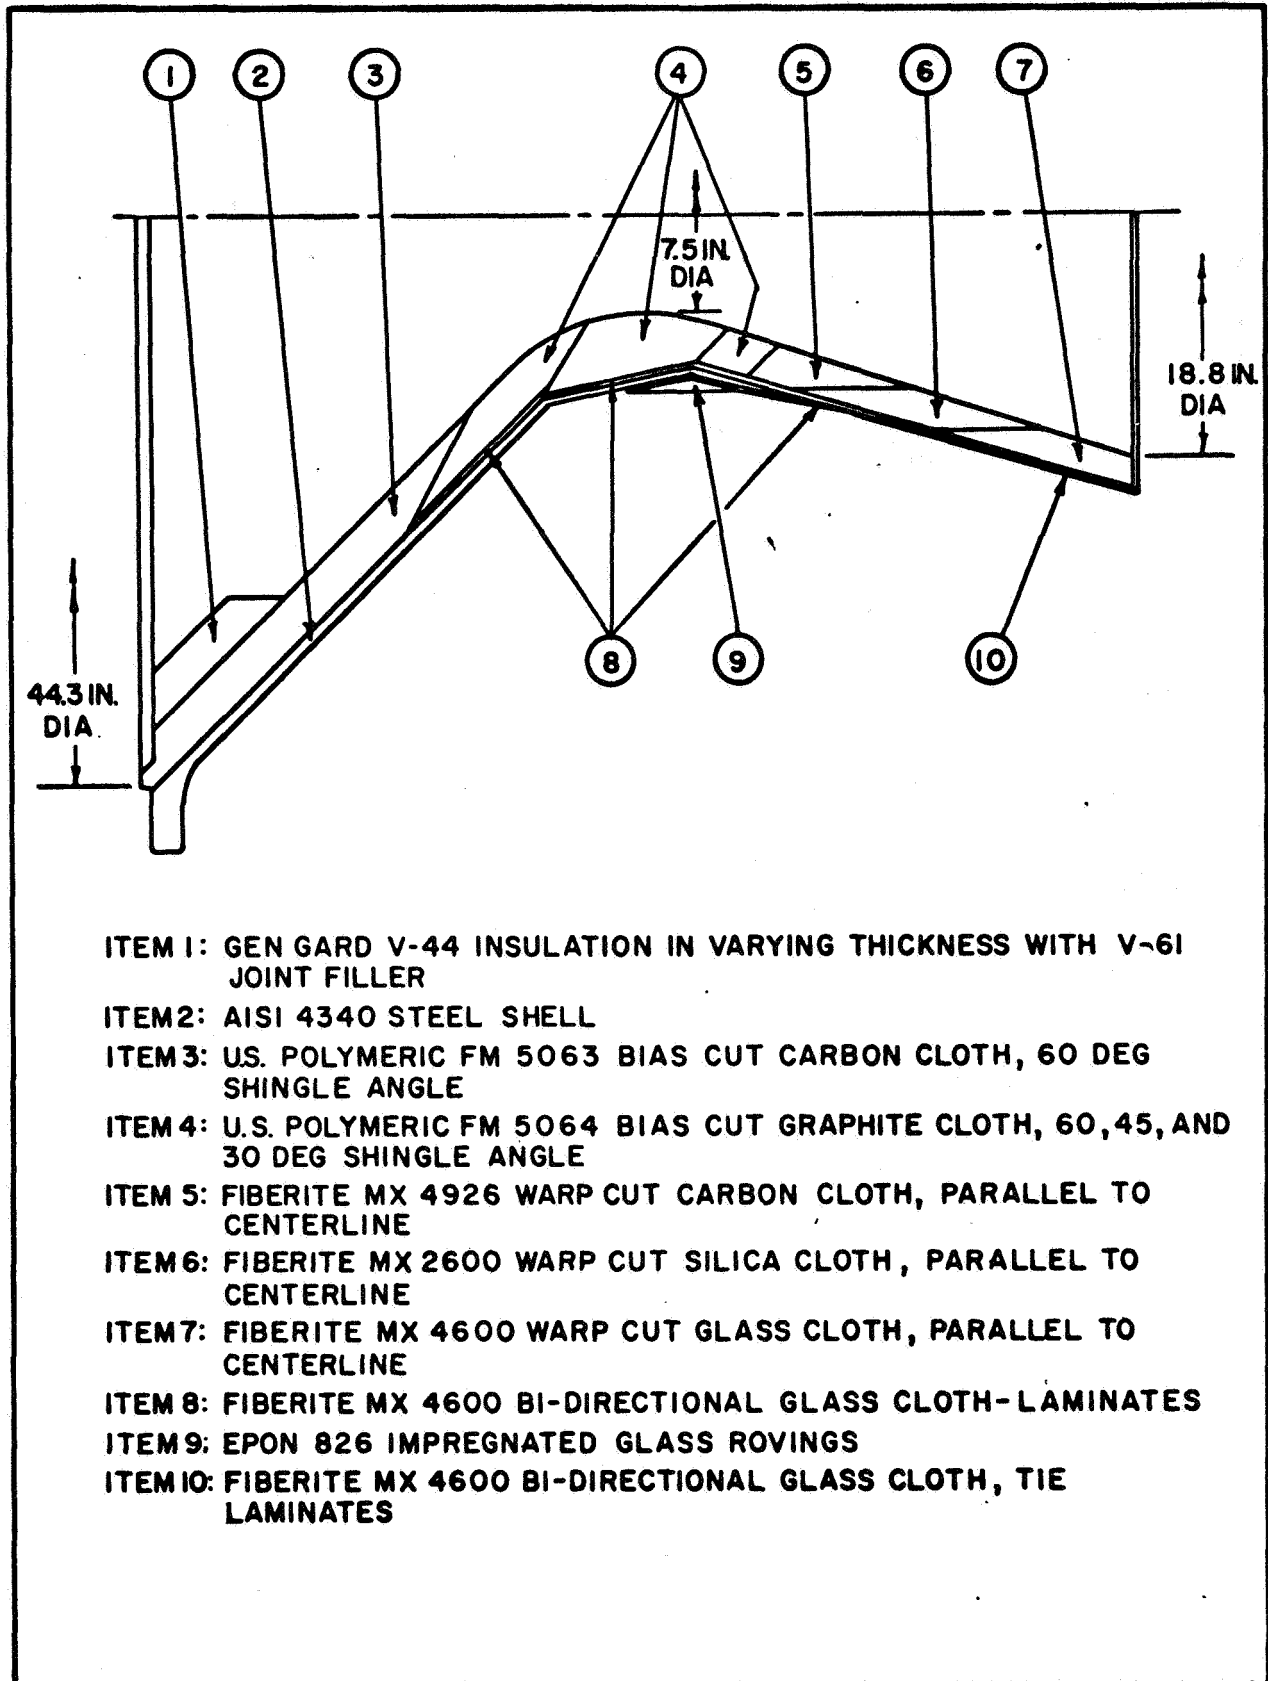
Nozzle Assembly Materials, 65-SS-2 Motor
